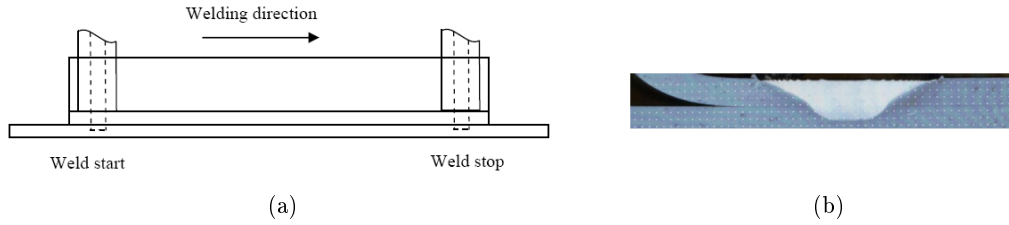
(a) Side view of the welding process (Marie and Allehaux, 2006). (b) Cross-section of the stiffener after friction stir welded on the plate (Marie and Allehaux, 2006).
